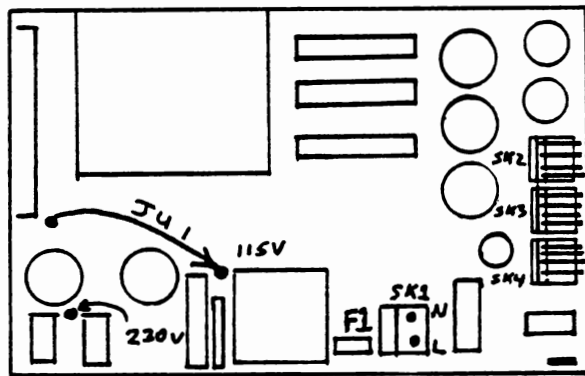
SPS-1 OUTLINE DRAWING
